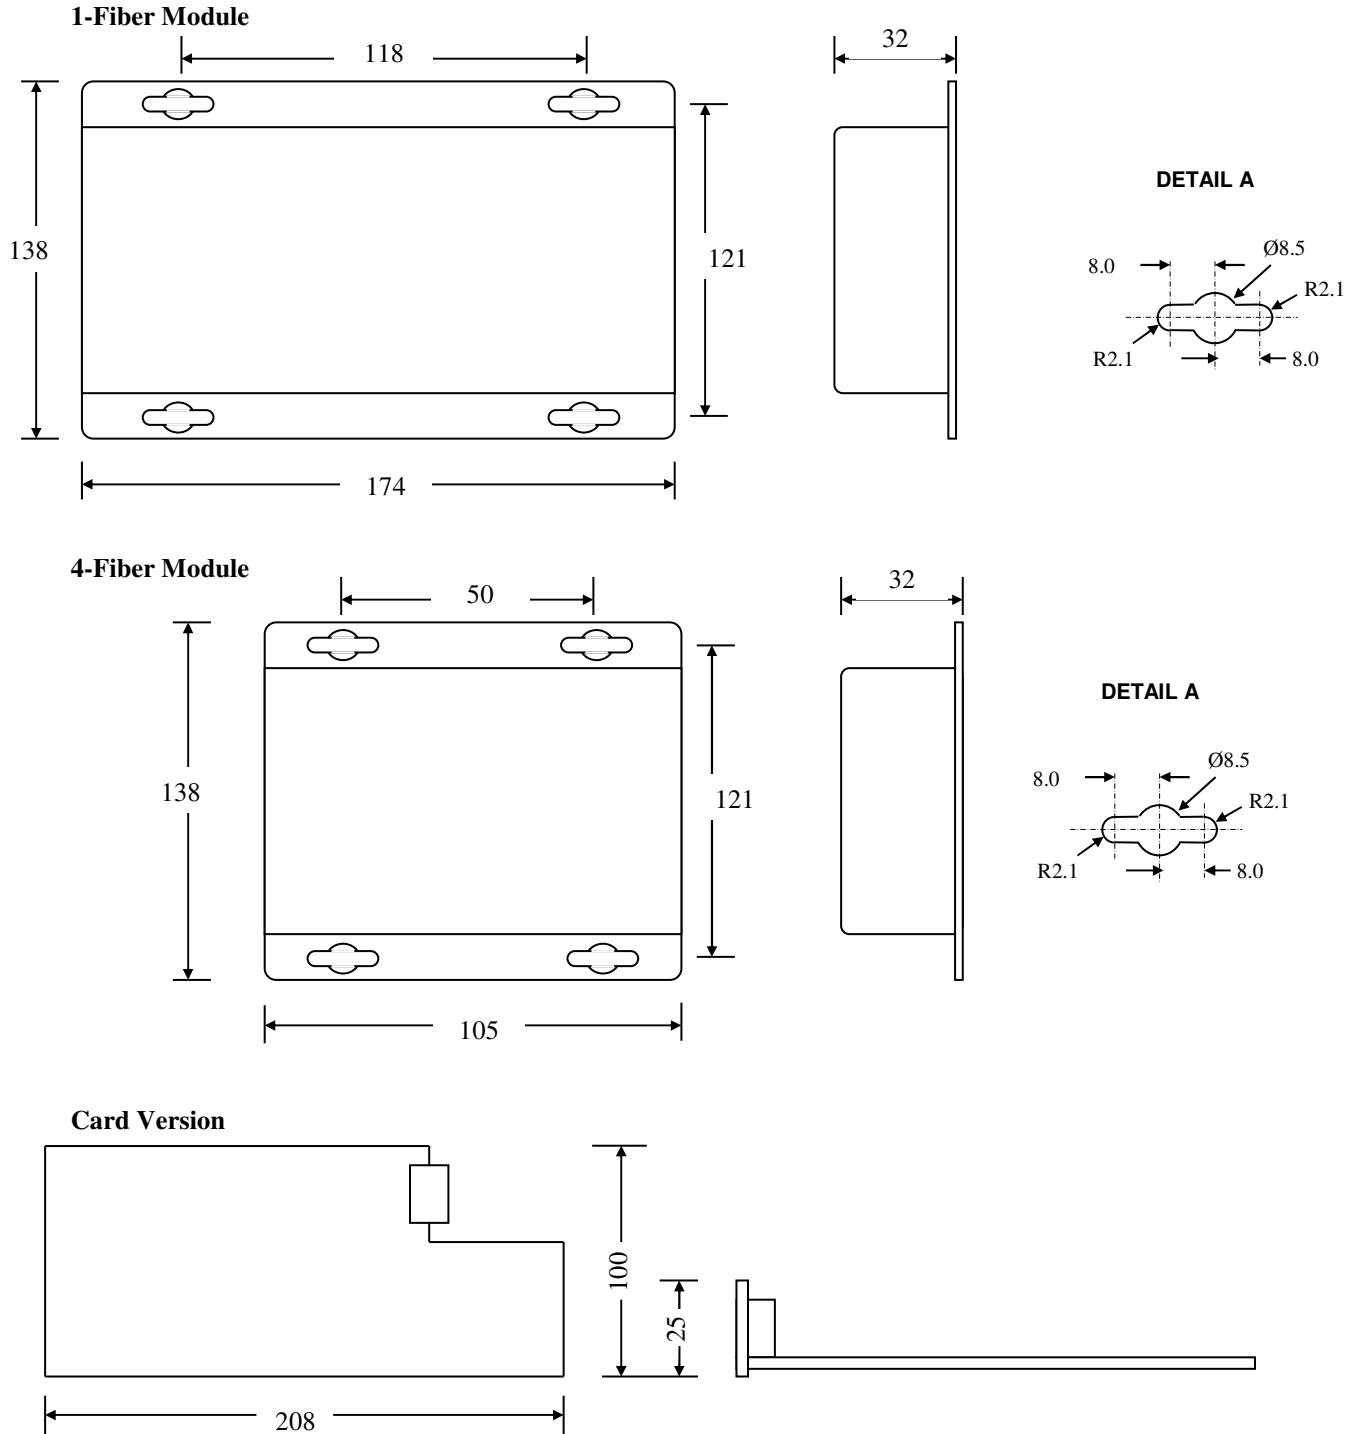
OSD8224 MOUNTING DIMENSIONS
